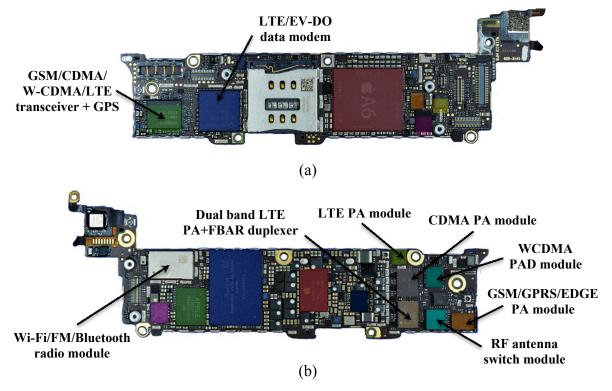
The PCB layout of the iPhone 5 [7]; (a) front side; (b) back side.
